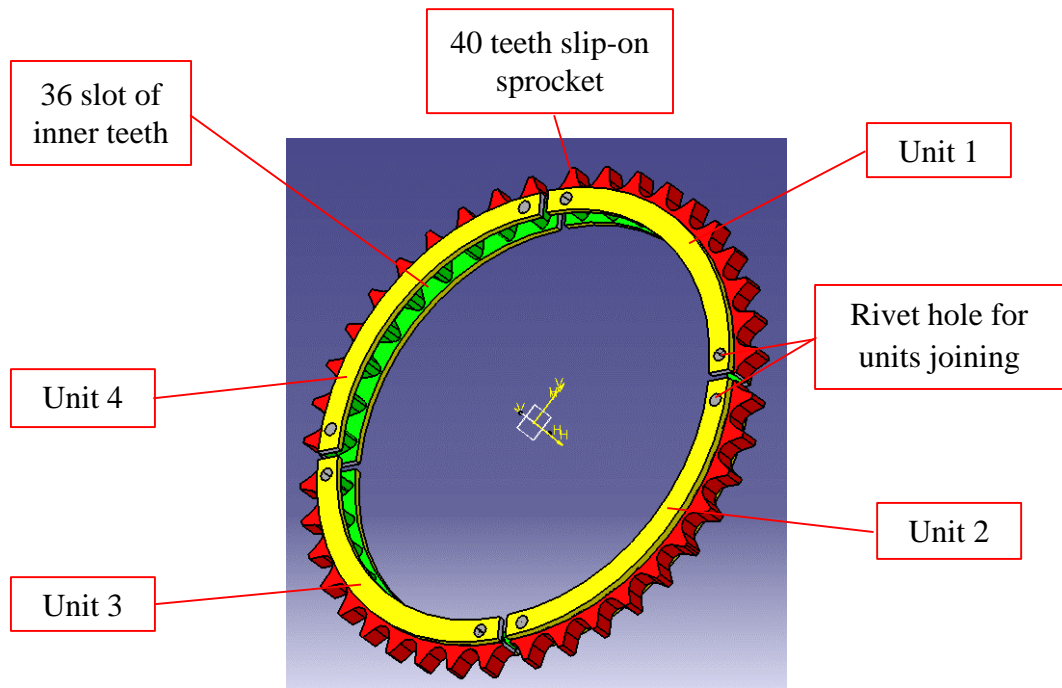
Isometric drawing view of slip-on sprocket for selected sectioning option
